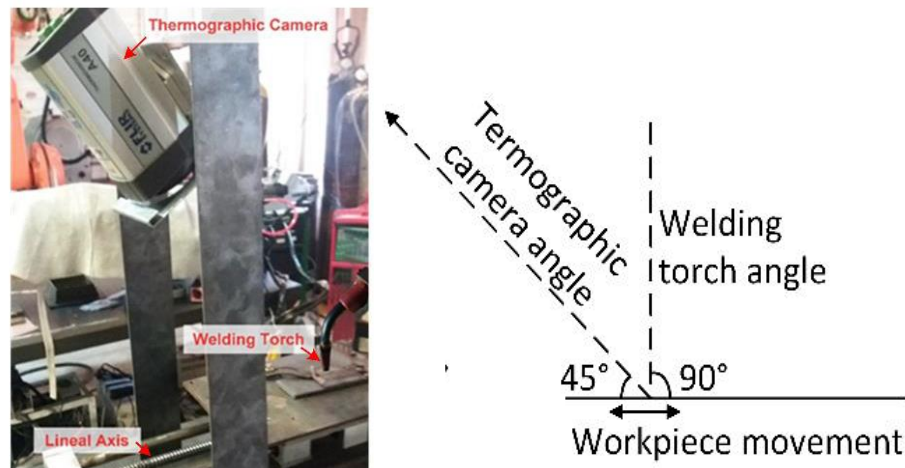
Robotic welding table with welding torch and thermographic camera (BESTARD; SAMPAIO; ALFARO, 2018).
